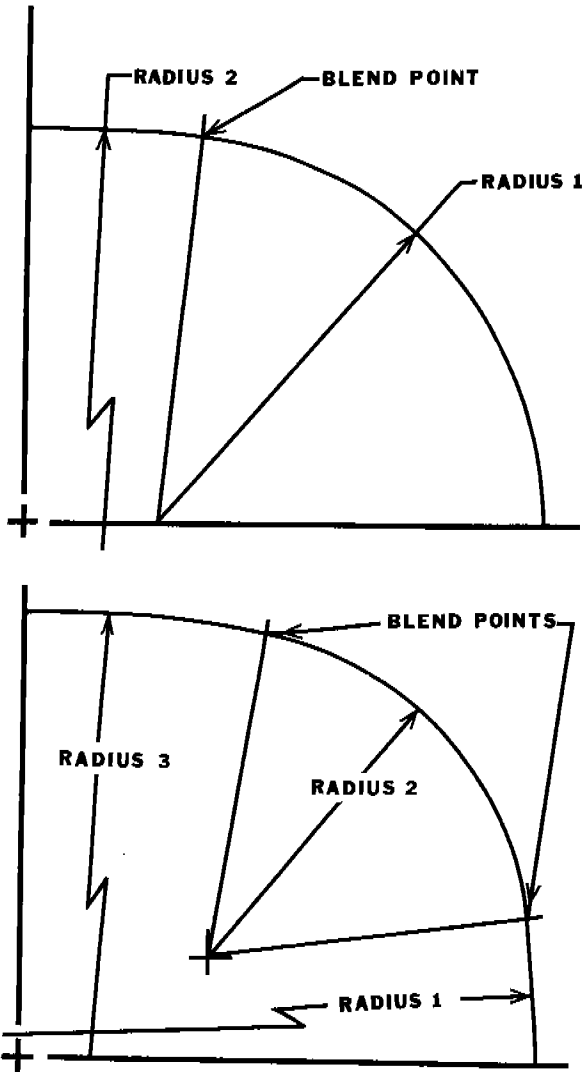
TYPICAL SECTIONS OF CONVENTIONAL HERMETIC COMPRESSOR HOUSINGS
